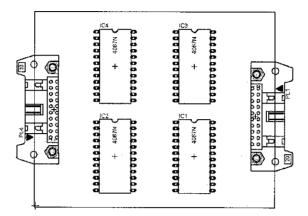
Component Layout of Multiplexing Circuit PCB Board.
